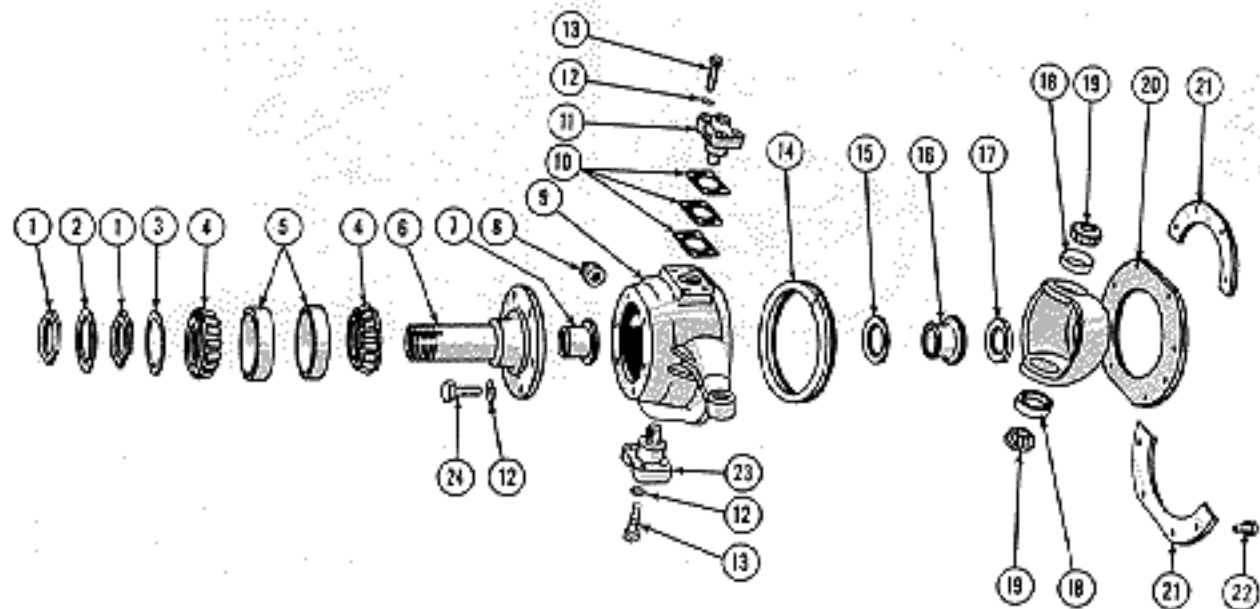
STEERING KNUCKLE AND WHEEL BEARINGS
